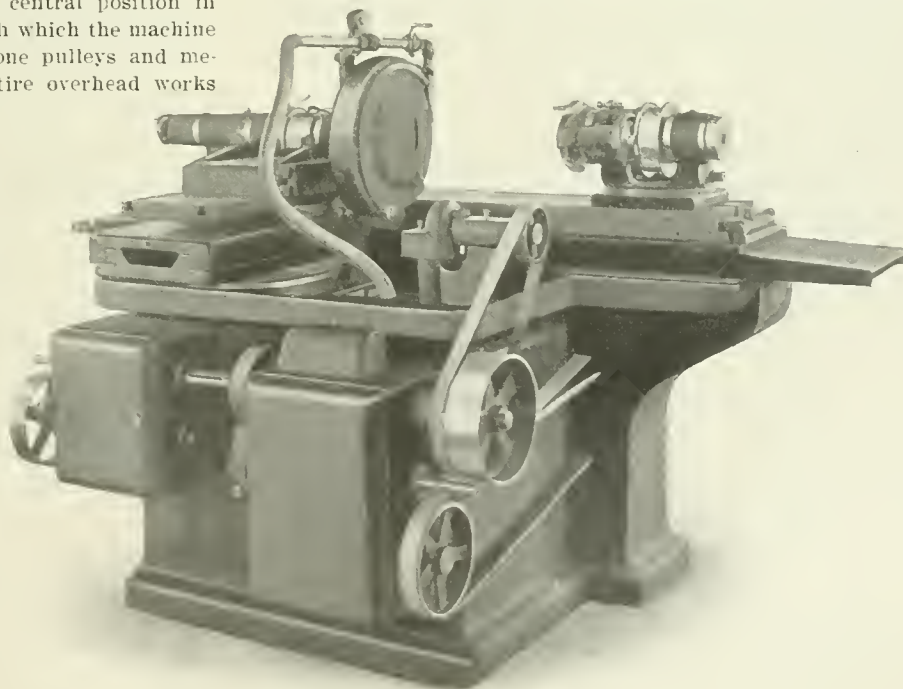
Rear View of Grinder showing the Feed and Speed Boxes
